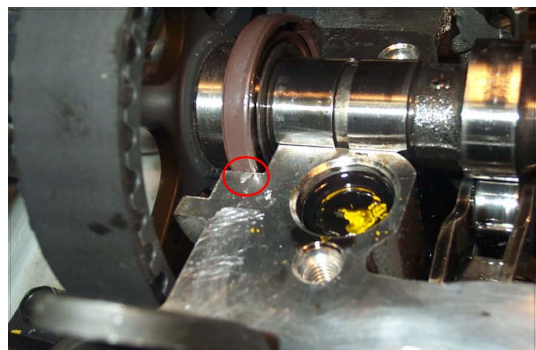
Engine leakage example by damaged camshaft bearing and seal assembly part
